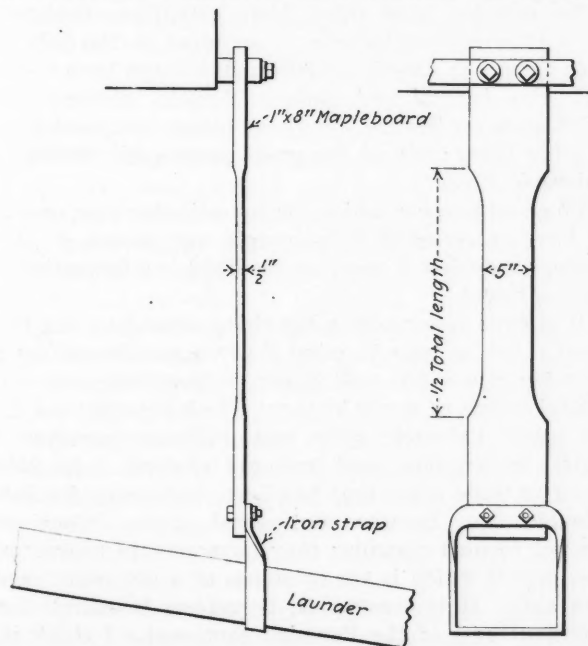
METHOD OF SUPPORTING SHAKING LAUNDER
